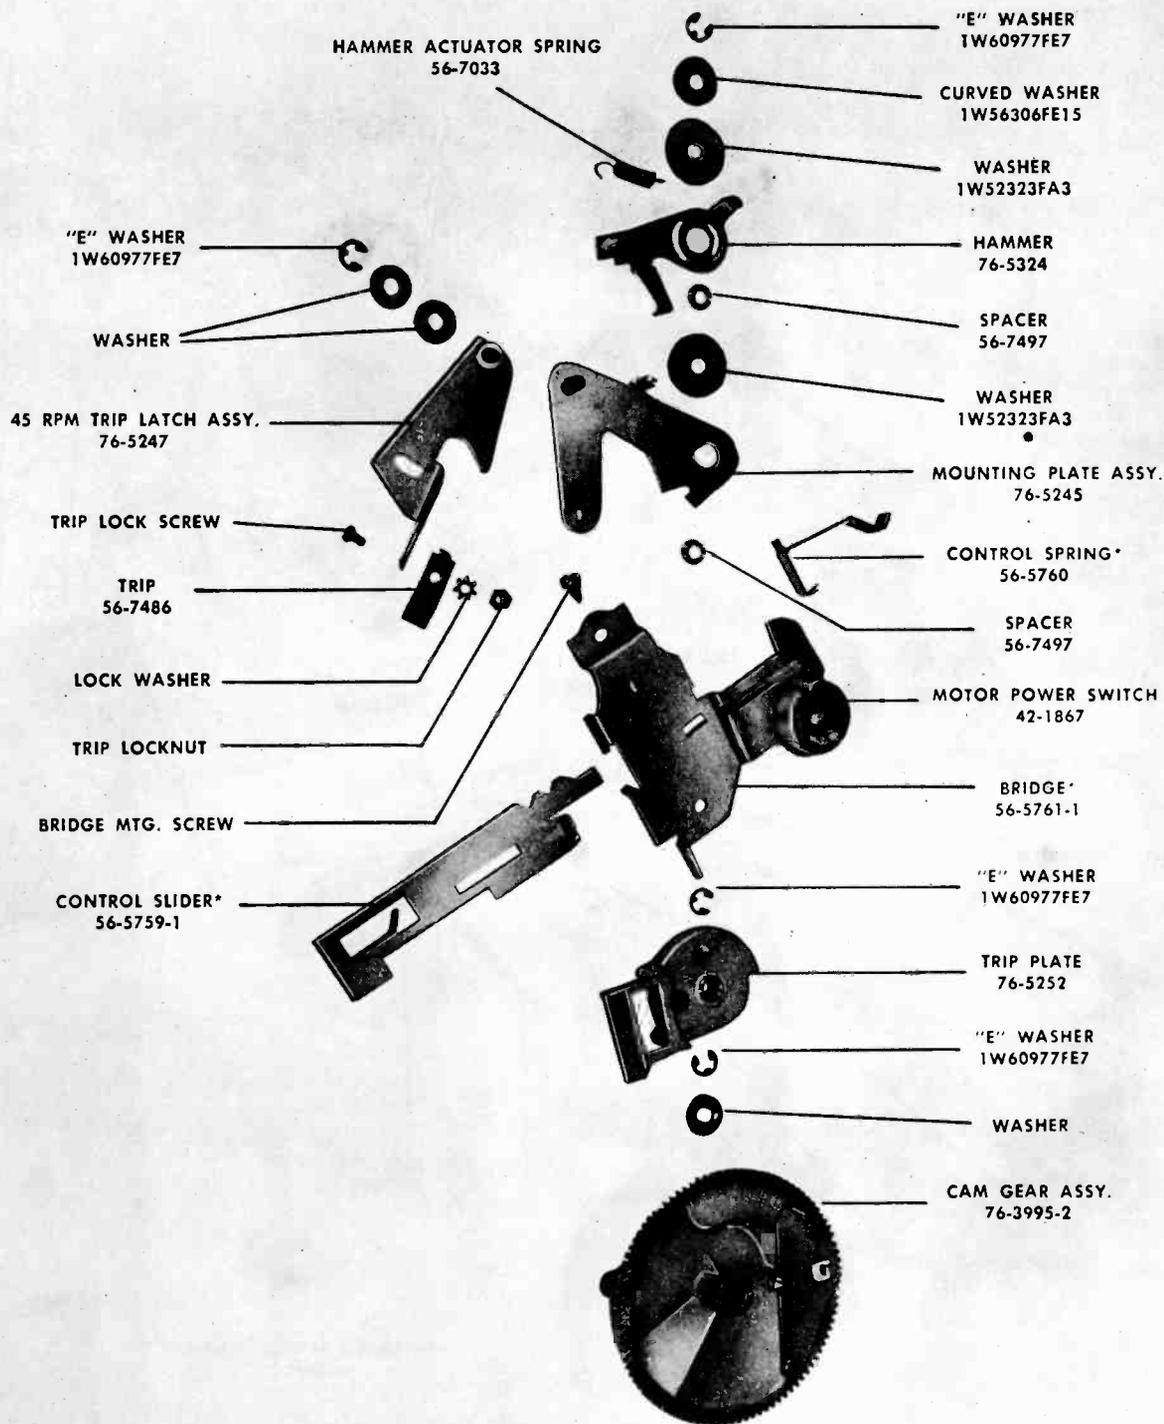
CAM-GEAR AND BRIDGE ASSEMBLIES (BRIDGE ASSEMBLY PARTS ARE IDENTIFIED BY *)
